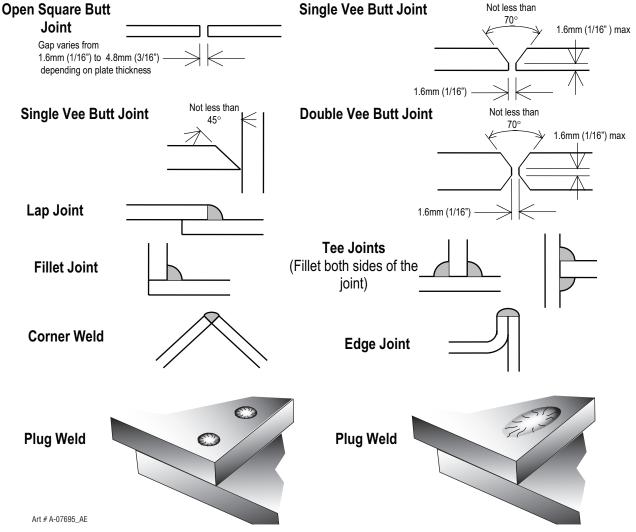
Typical Joint Designs for Arc Welding
